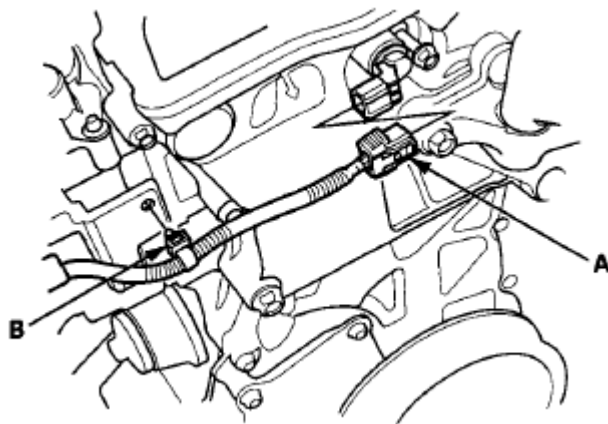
Identifying VTC Oil Control Solenoid Valve Connector And Harness Clamp
